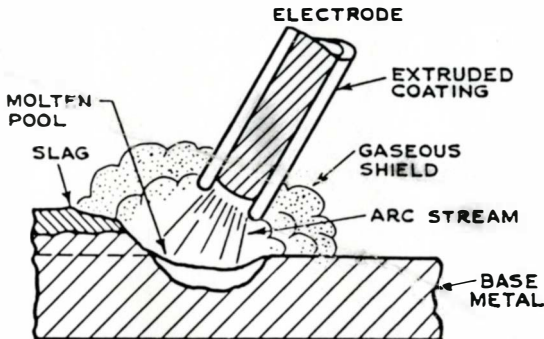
Diagram showing the metal arc welding process.
